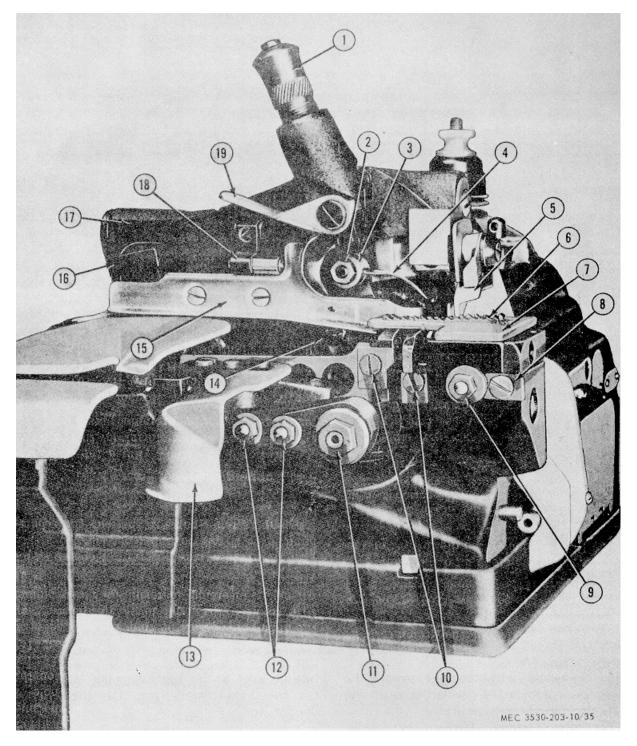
Overedge sewing machine, left view, showing cloth overedge plate opened.
